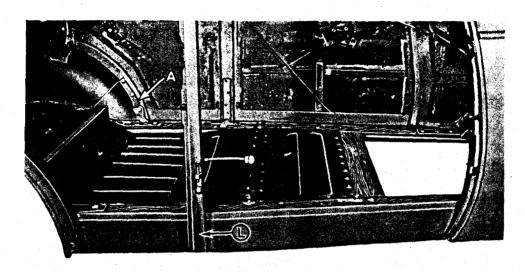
Illustration No. 32 Center View of Floor Pan and Sill Construction.
